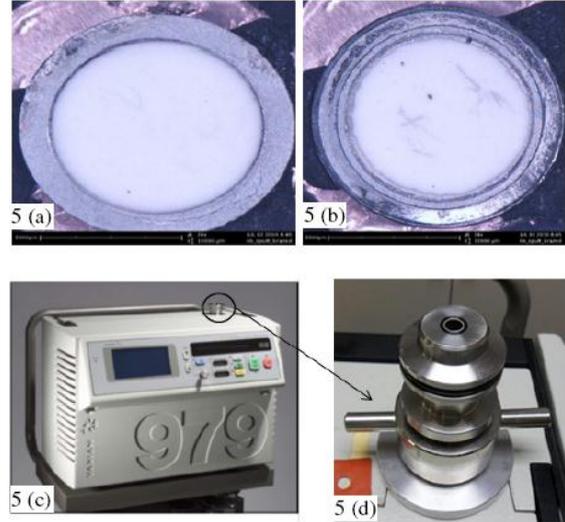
(a, b) Front and back side of the brazed assembly. (c, d) Leak detector and test port.
